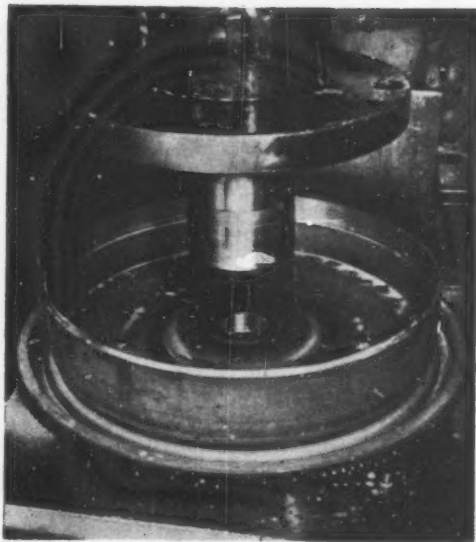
Set-up for Roller Burnishing a Thrust Face on the Front Cover Assembly of a Torque Converter. The Tool is Provided with Six Radial Rollers
